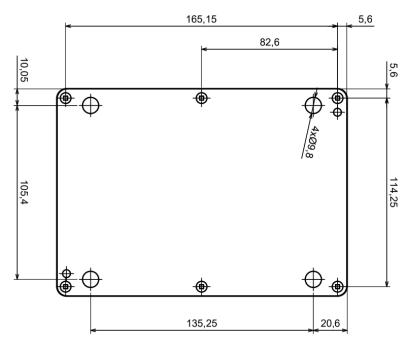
Dimensions of available mcr PSR/PRSC installation holes.
